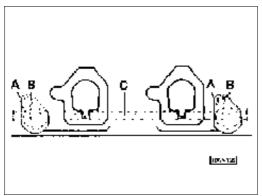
Mounting positions of the injection pump control bar guide supports.
